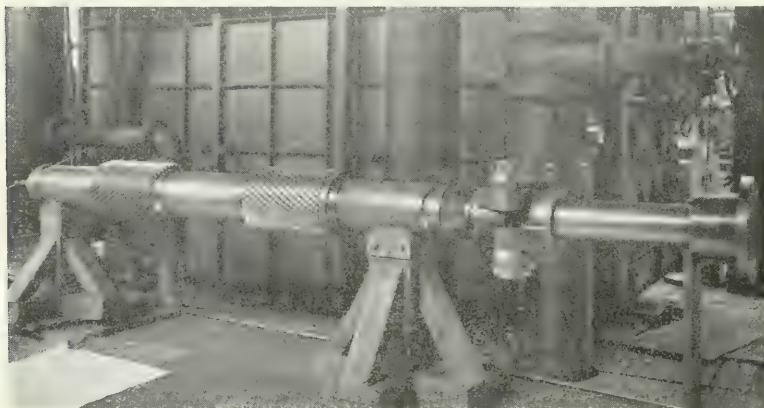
PINION SHAFT AND COUPLING OF MELVILLE AND MACALPINE REDUCTION GEAR
